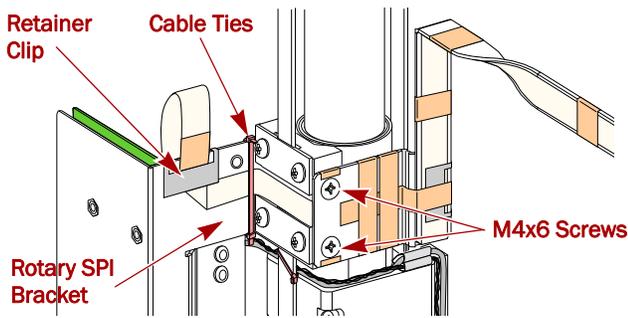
Key Components on Rear Z-Axis Assy. (Front View)
